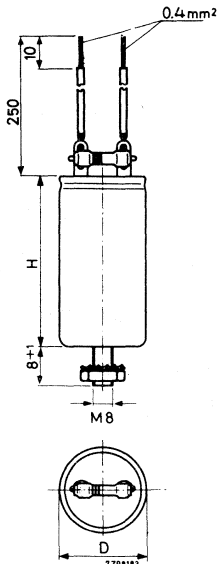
Version with soldering tags, provided with leads and discharge resistor
